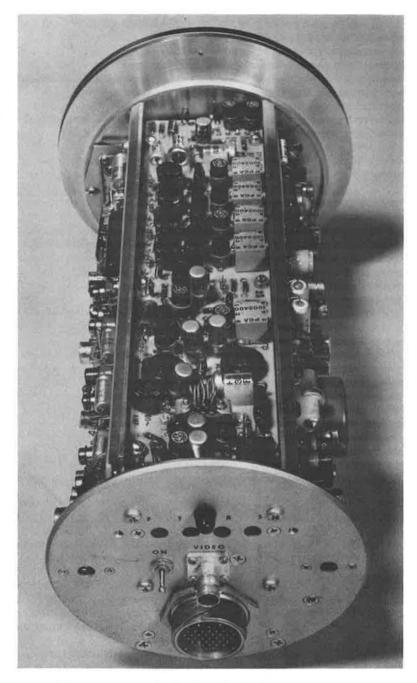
Camera with cover removed showing the three separate component boards (rear plate has provisions for input-outputs and field adjustments).
